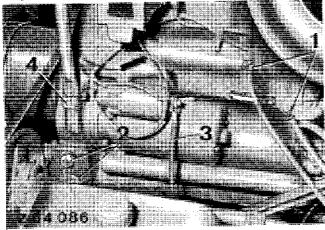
Removing Various Engine Connections Near Hydraulic Pump and Starting Motor (935 Shown)
